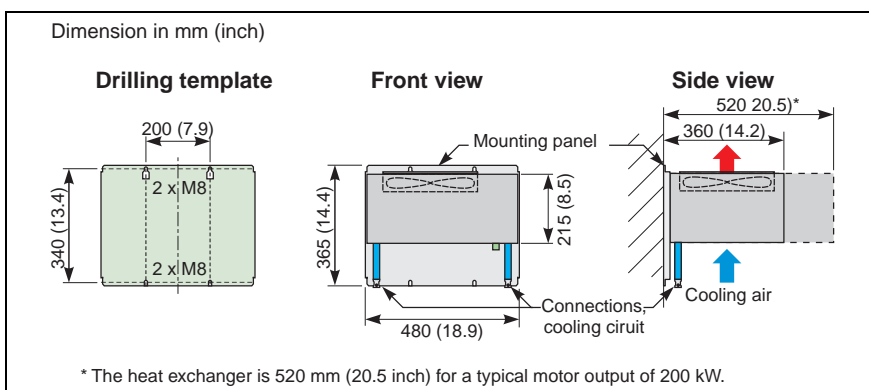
Dimension drawing heat exchanger for wall mounting, size class C and D
